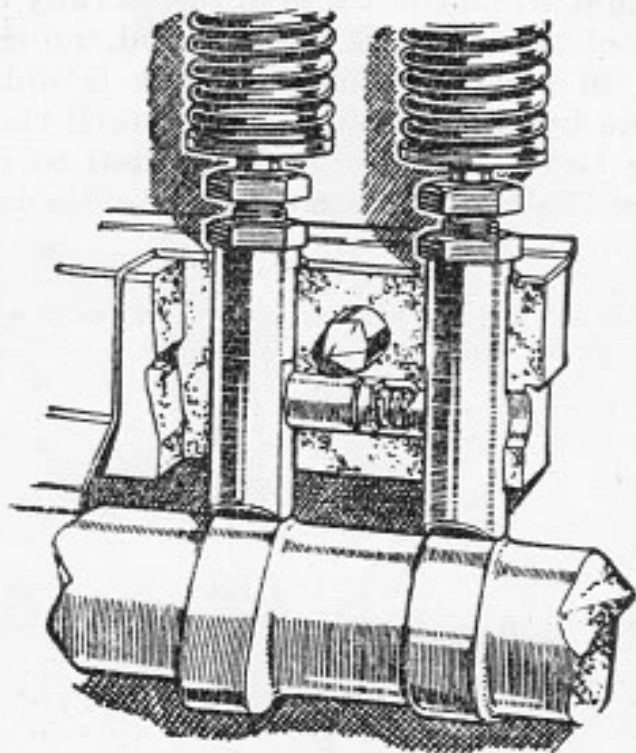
TAPPET ADJUSTMENT OF SIDE VALVE MODELS,
